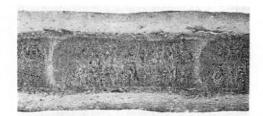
Seam weld in heat resisting steel (Nimonic 75),
